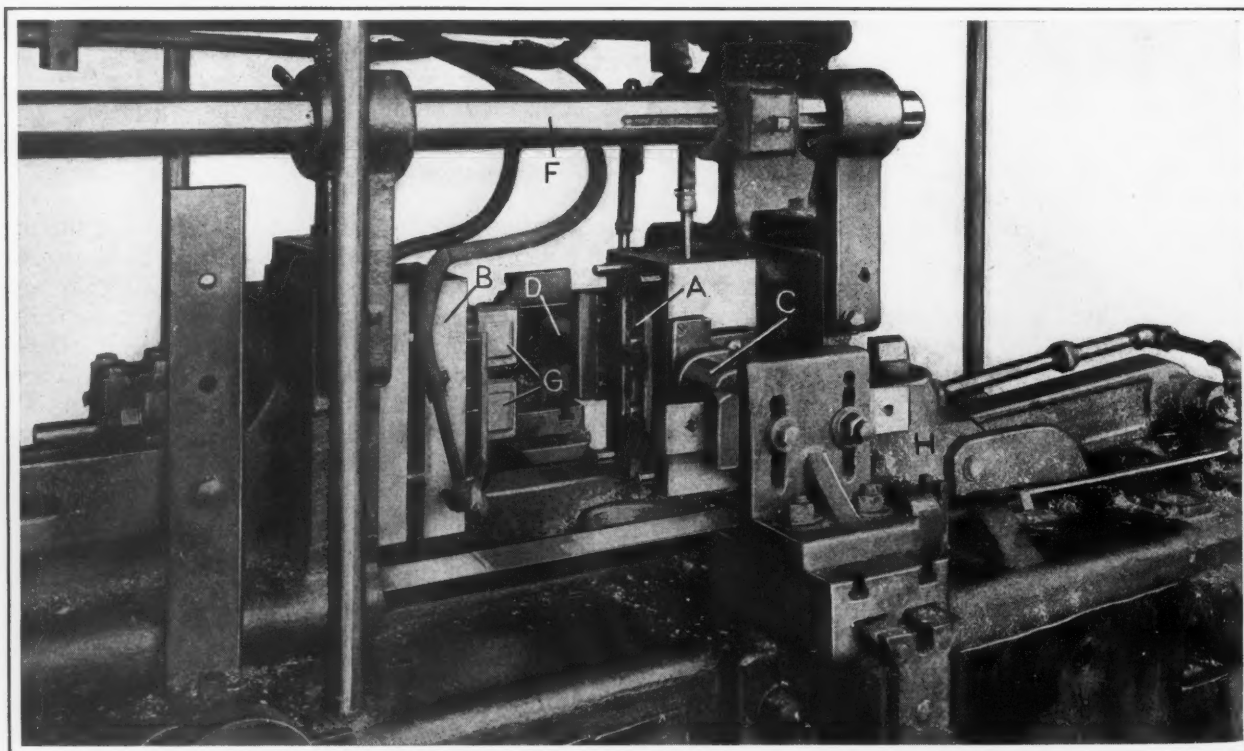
Die-casting Machine Equipped with a Die Having Cores Pulled from Both Sides
